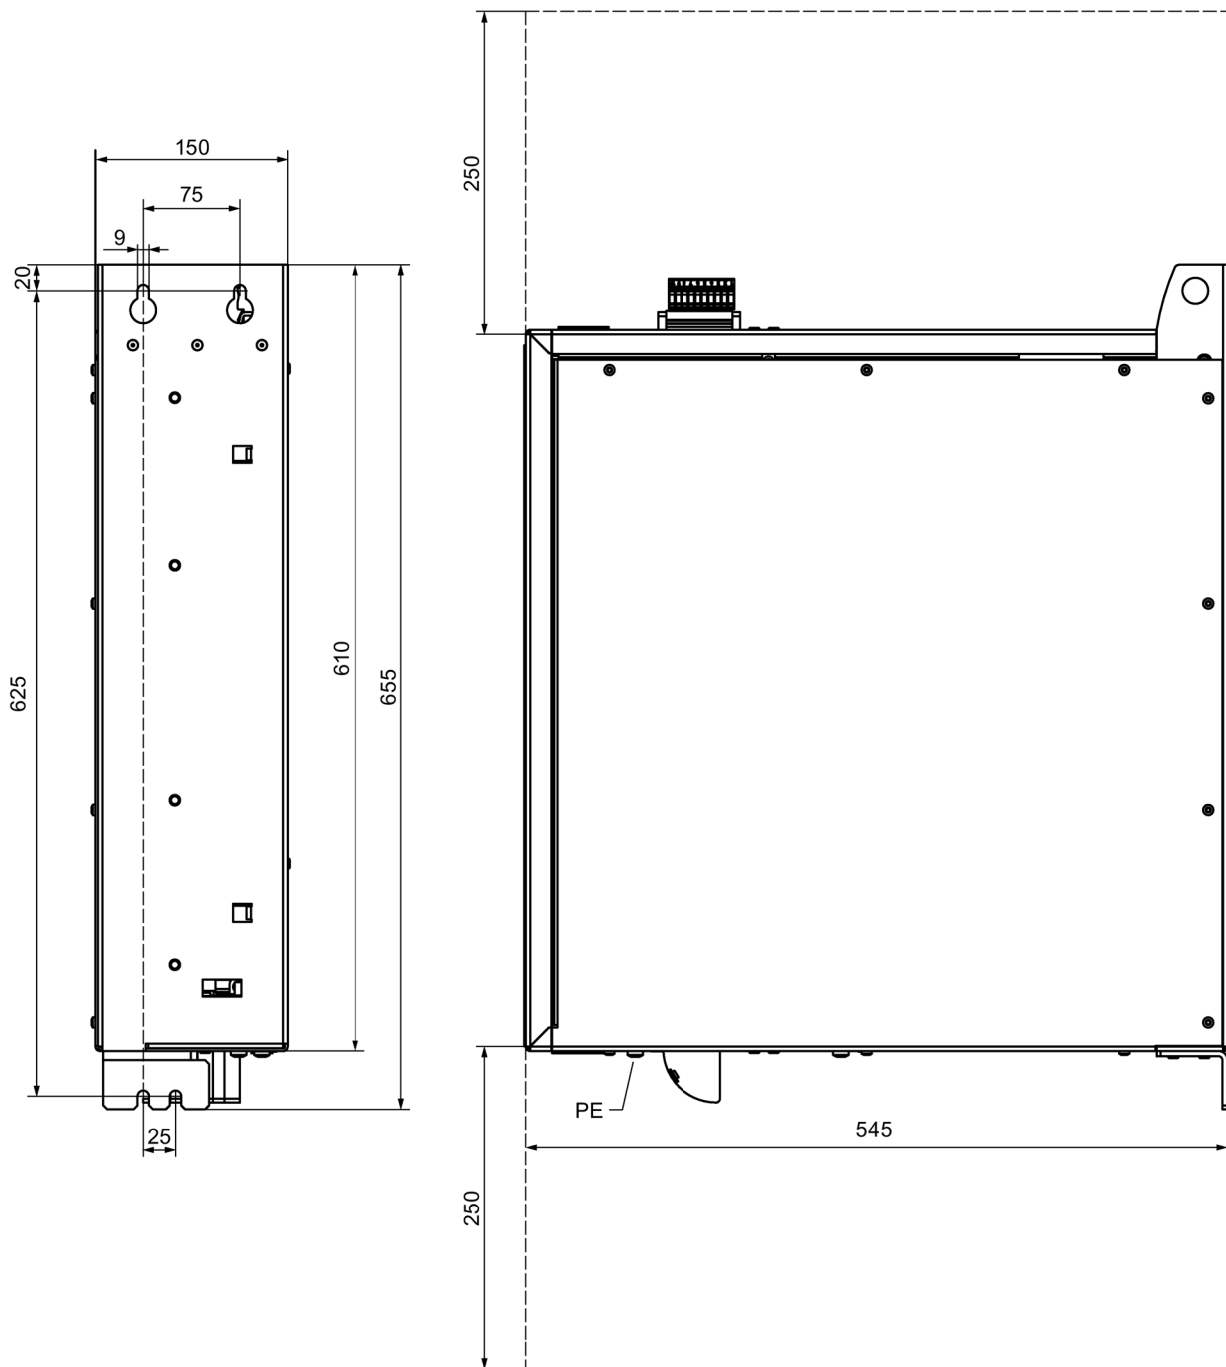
Dimensions and mounting positions for 30 kW devices; from product version 02. (dimensions in mm)
